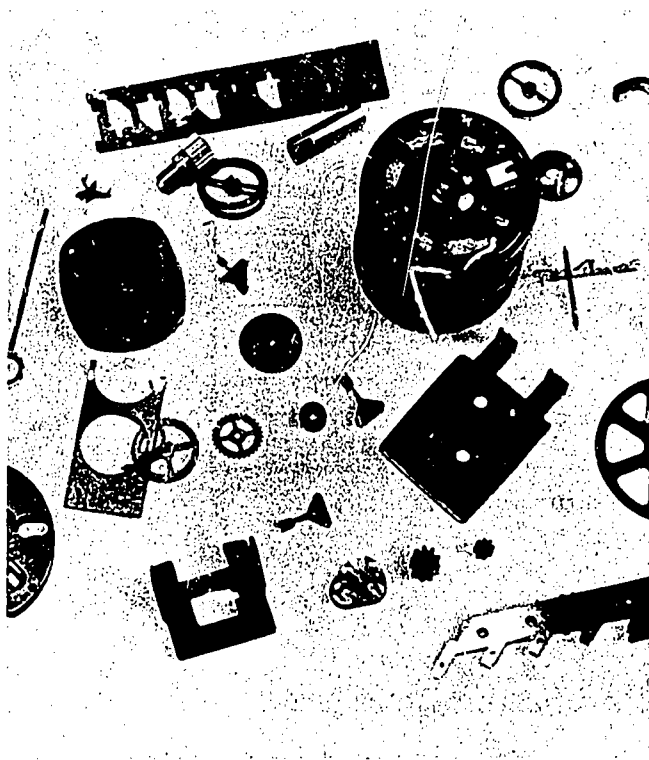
Decisions must be made as to which parts a company will make and which parts it will buy.
